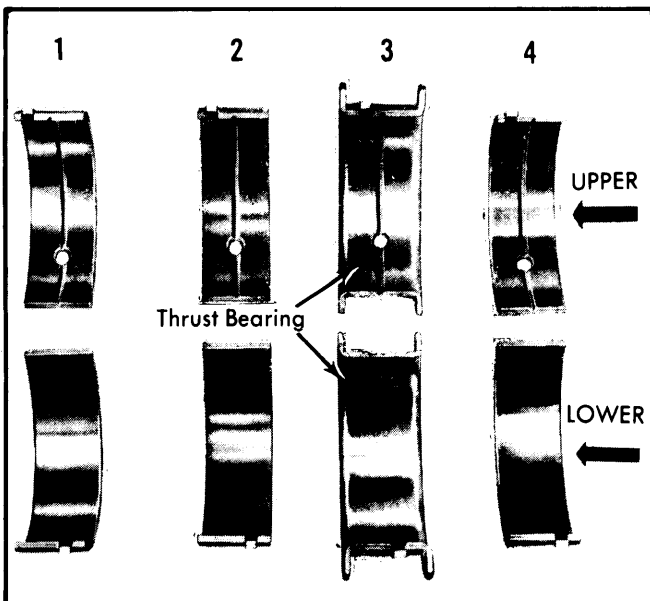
Main Bearing Identification Showing Location of Thrust Bearing
